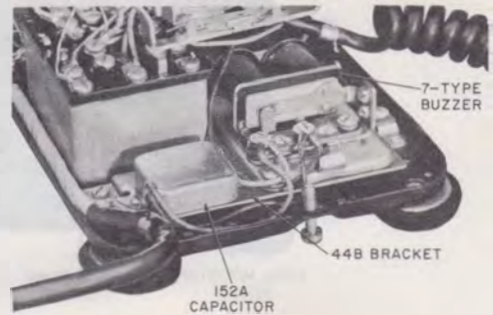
7-Type Buzzer and 152A Capacitor Mounted on 44B Bracket
